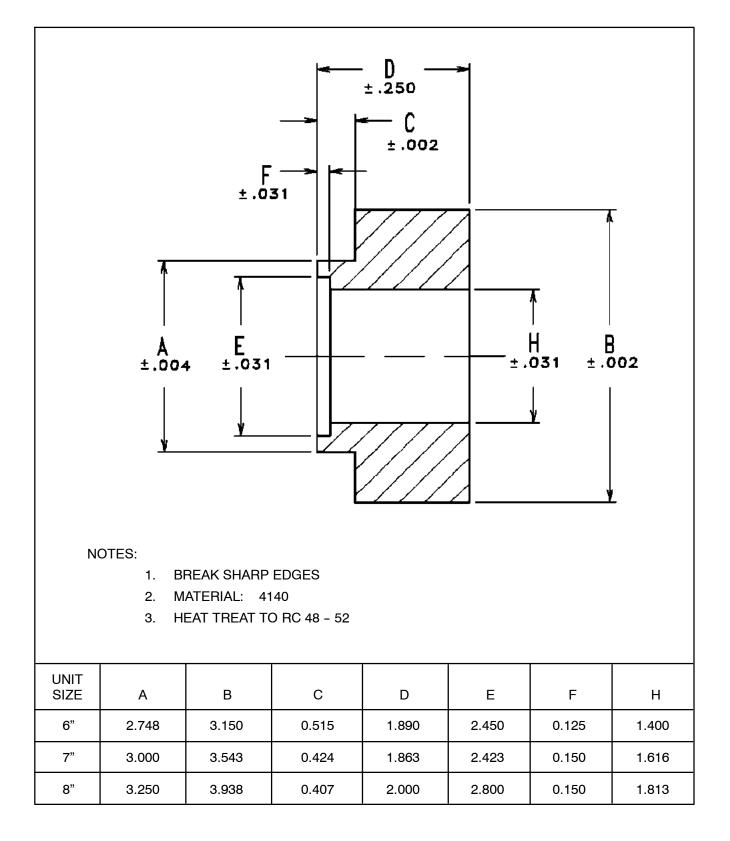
MECHANICAL SEAL INSTALLATION TOOL - SK2152
